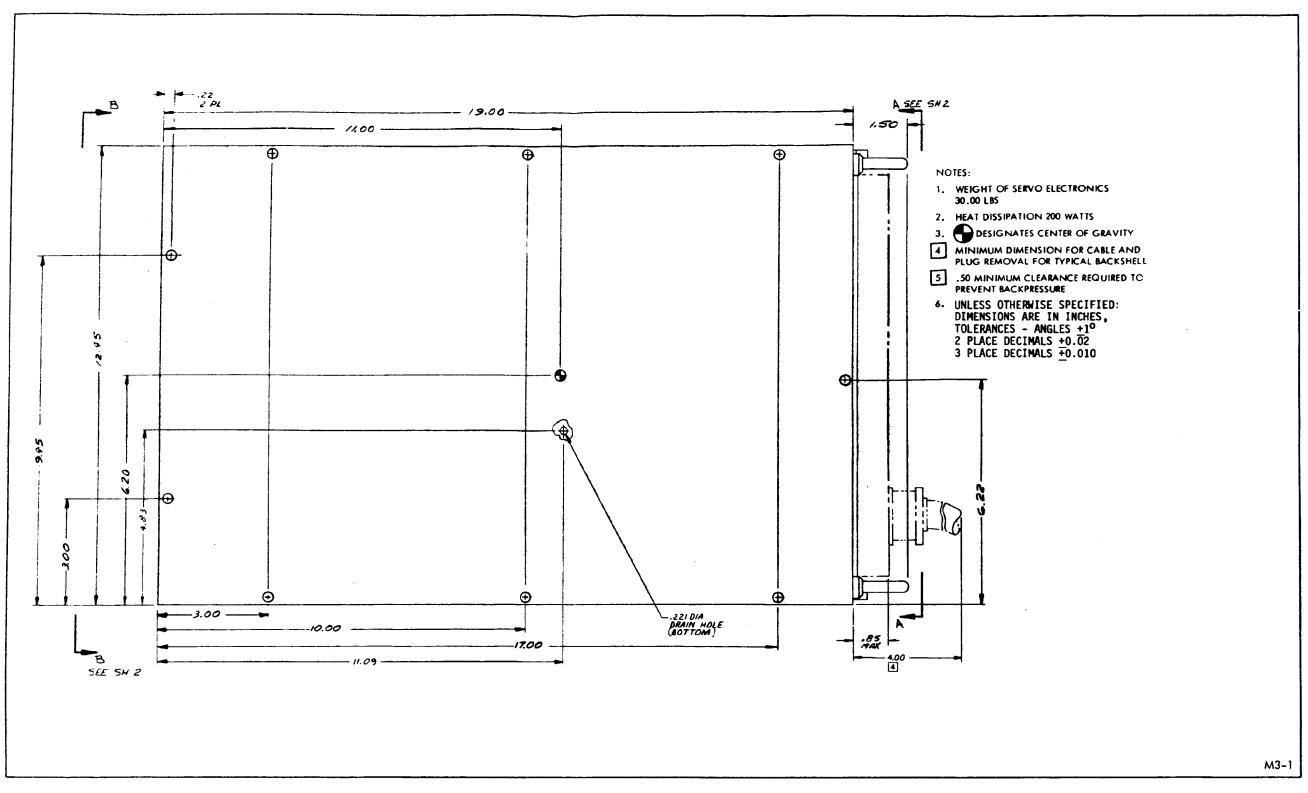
Control servomechanism, outline drawing. (sheet 1 of 2)
